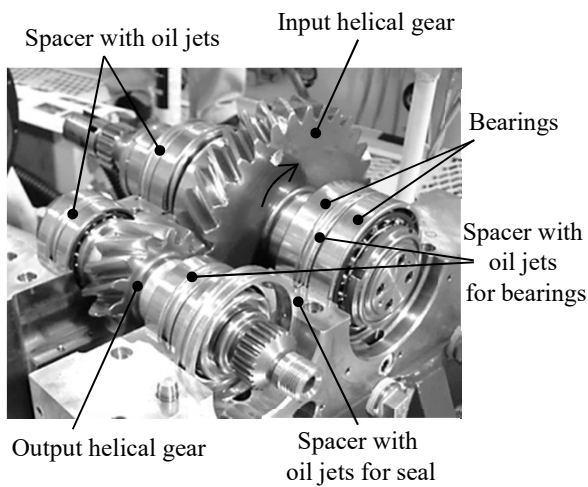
Two-axis helical gearbox used in this research (repost of Fig. 3.1-2)
